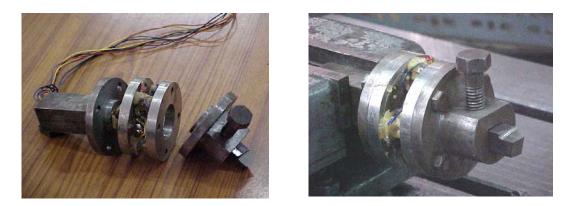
Photographs of a strain gauge type 2 – D turning dynamometer and its major components.
